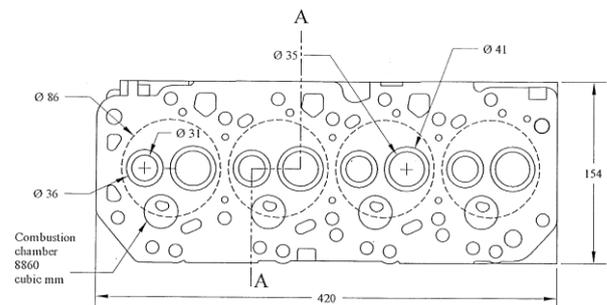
The lower view of 1974cc Gray Cast Iron Alloy Engine head
